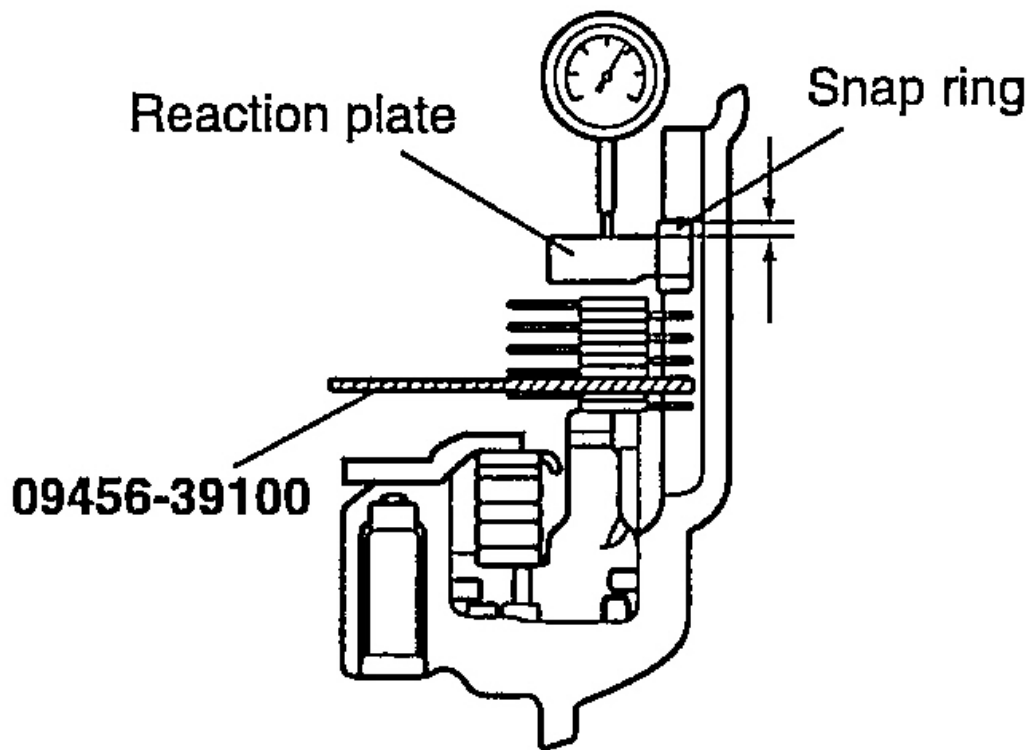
Installing Pressure Plate Of The Low-Reverse Brake, Brake Discs & Snap Ring
